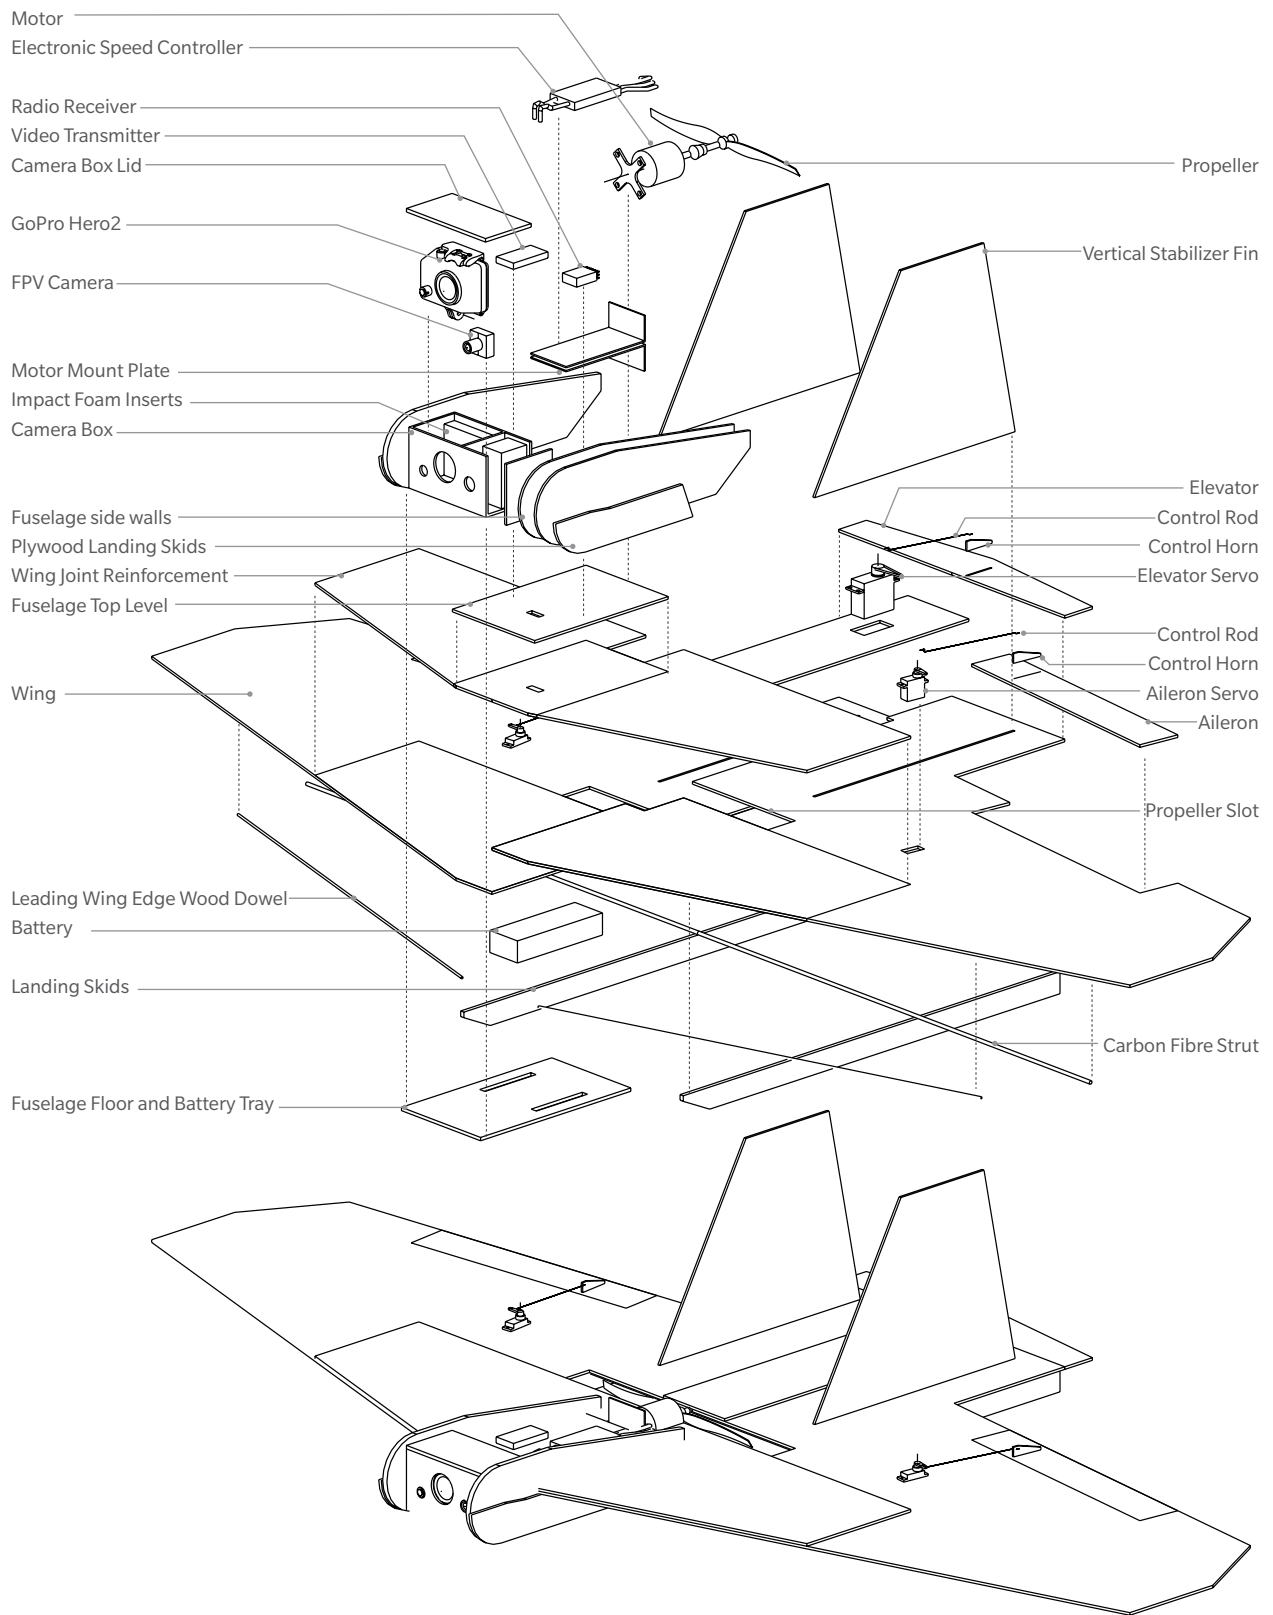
Plane-02 Exploded Axonometric. *Drawing by Author.
